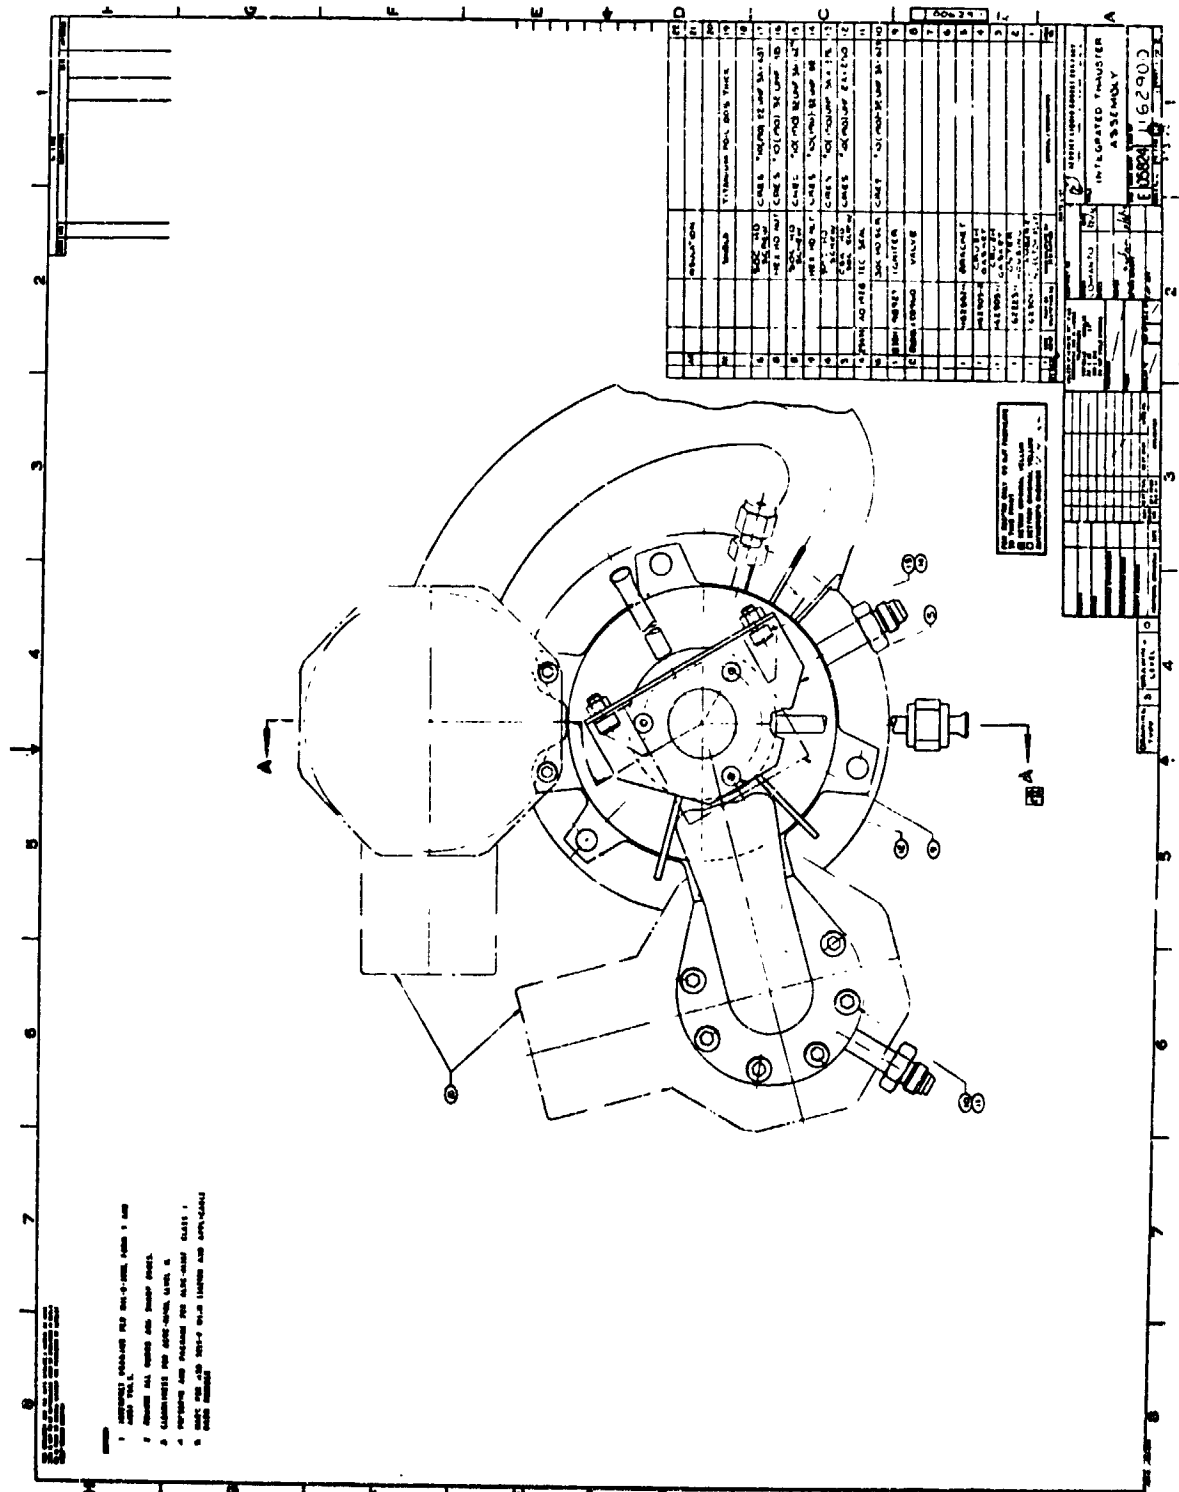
Integrated Thrust Assembly (Sheet 1 of 2)
